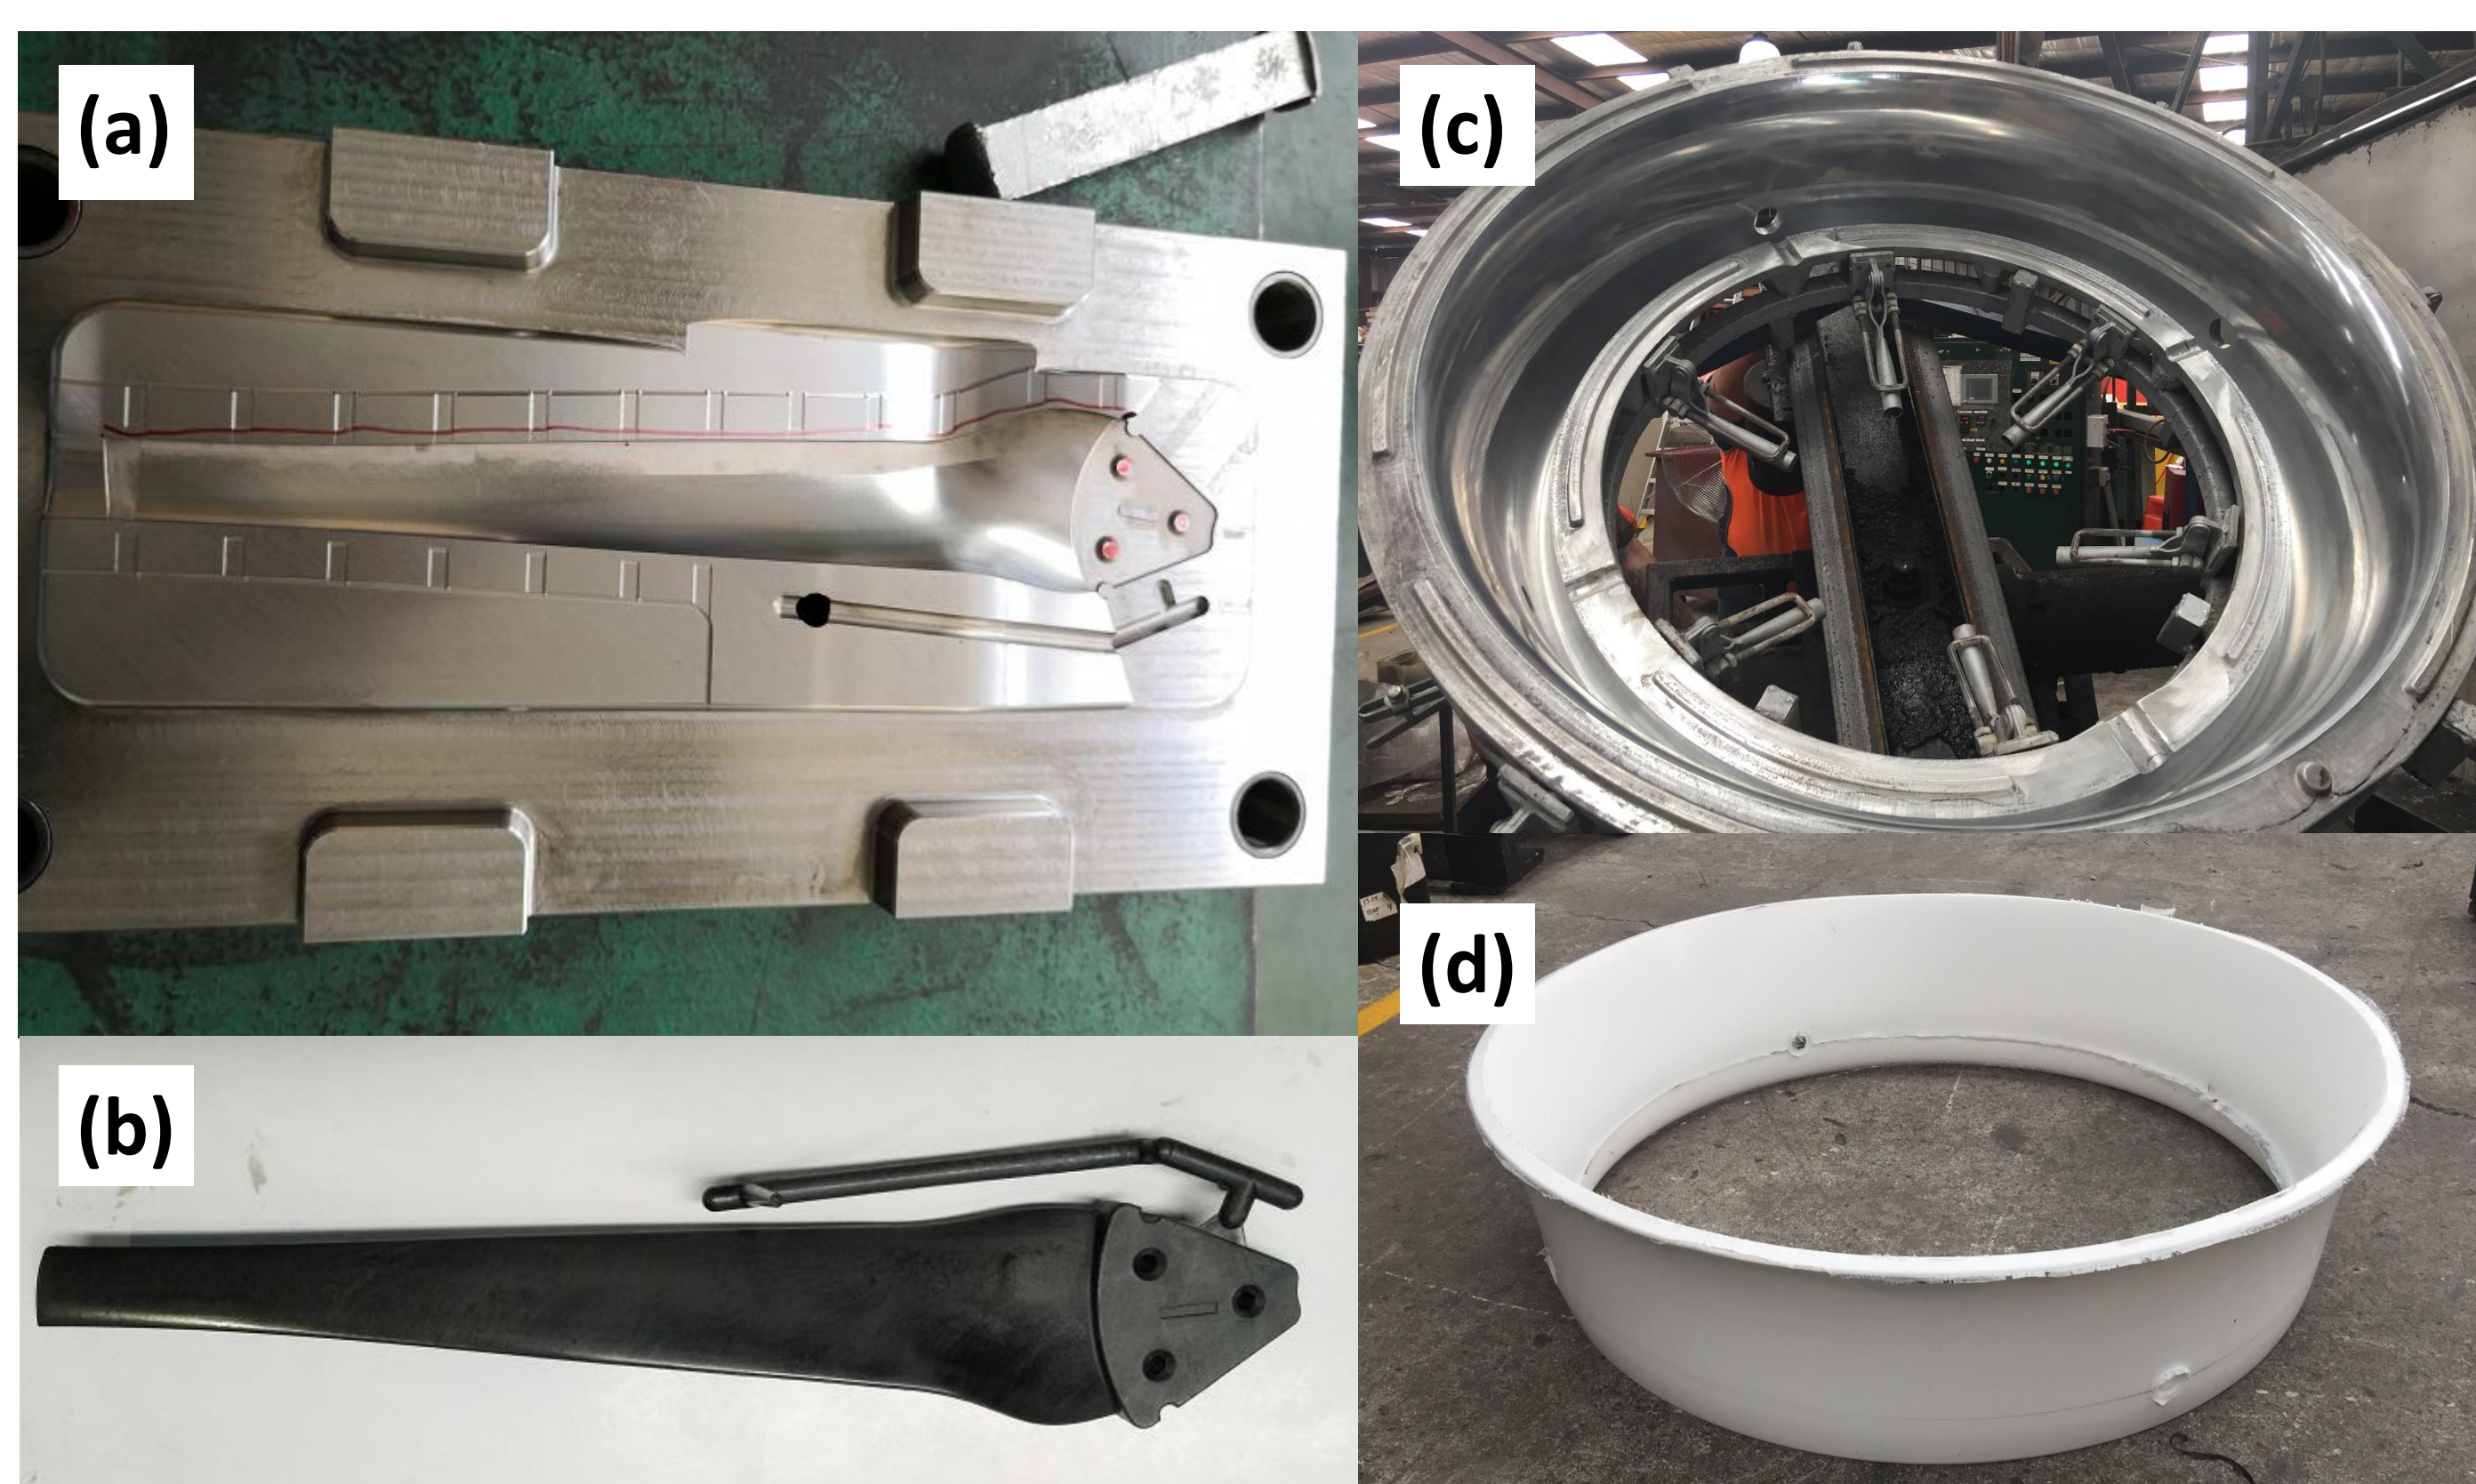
Blade mold (a) and completed blade (b), diffuser mold (c) and rotor molded part (d).
